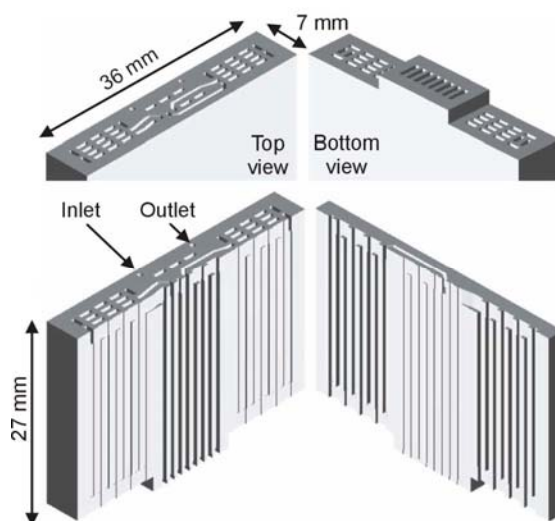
CAD drawing of MSL package, 2.4 m in length with channel dimensions of 0.5 mm × 0.5 mm.
